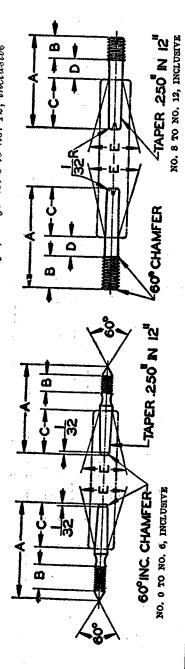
American Gage Design Standard thread plug gages, details of construction.
